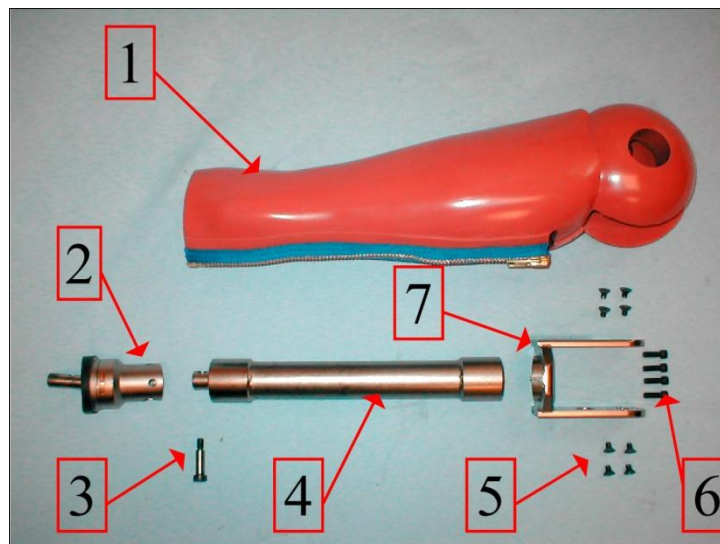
LOWER LEG, EXPLODED VIEW
